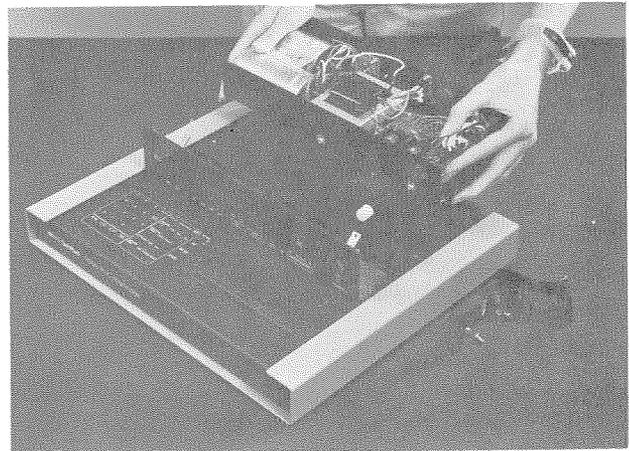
Removal of the power supply. The ribbon cable must be disconnected first. The display board can be left in place, but has been removed in this picture.
